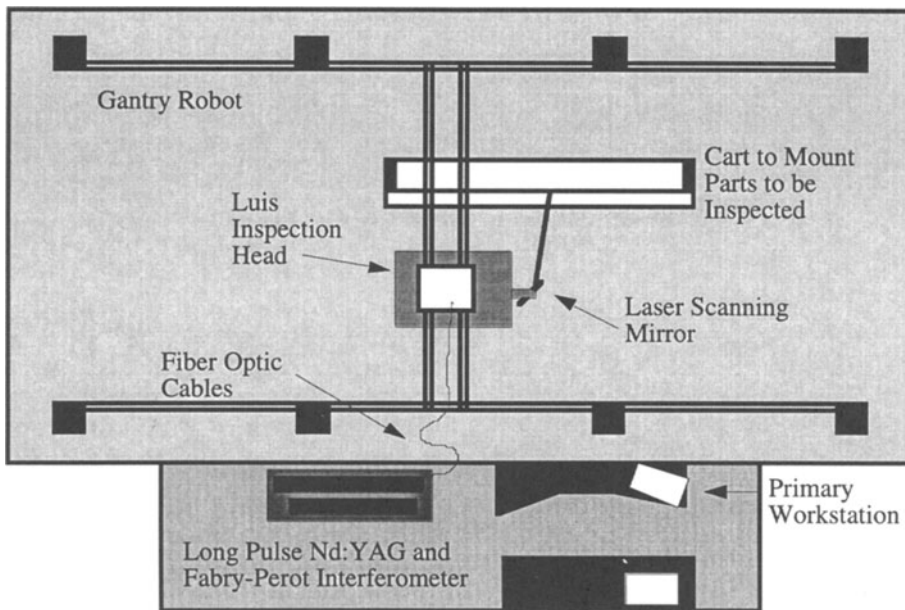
Schematic drawing of the LUIS inspection system.
